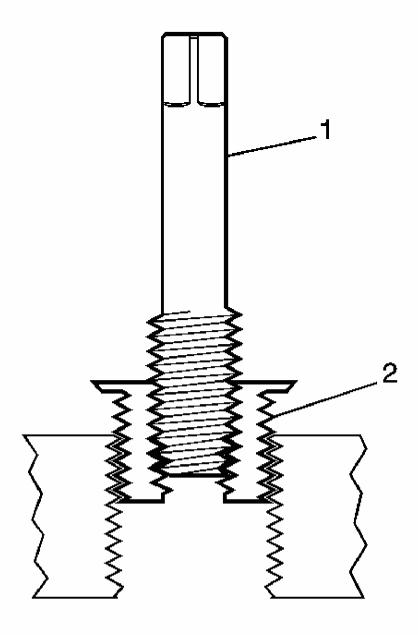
Installing Insert - Tapered Thread Courtesy of GENERAL MOTORS CORP.
